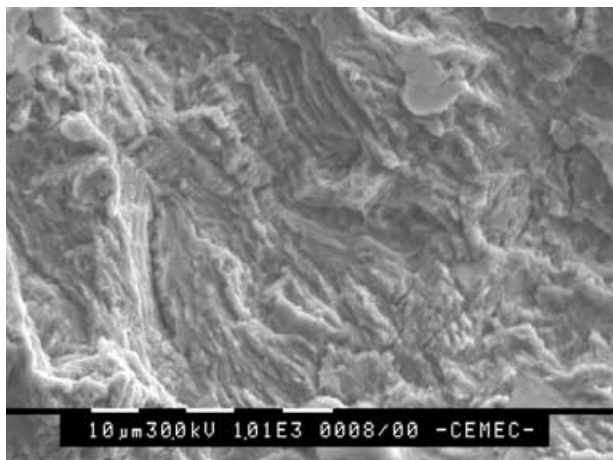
($\times 1000$) Fatigue striations in the fracture surface of the remaining crack.
